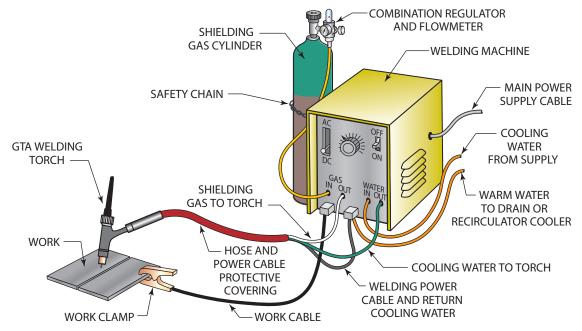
Gas tungsten arc welding equipment.
